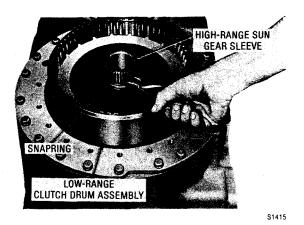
Removing high-range sun gear sleeve snapring (TRT 2221-1, 2421-1)
